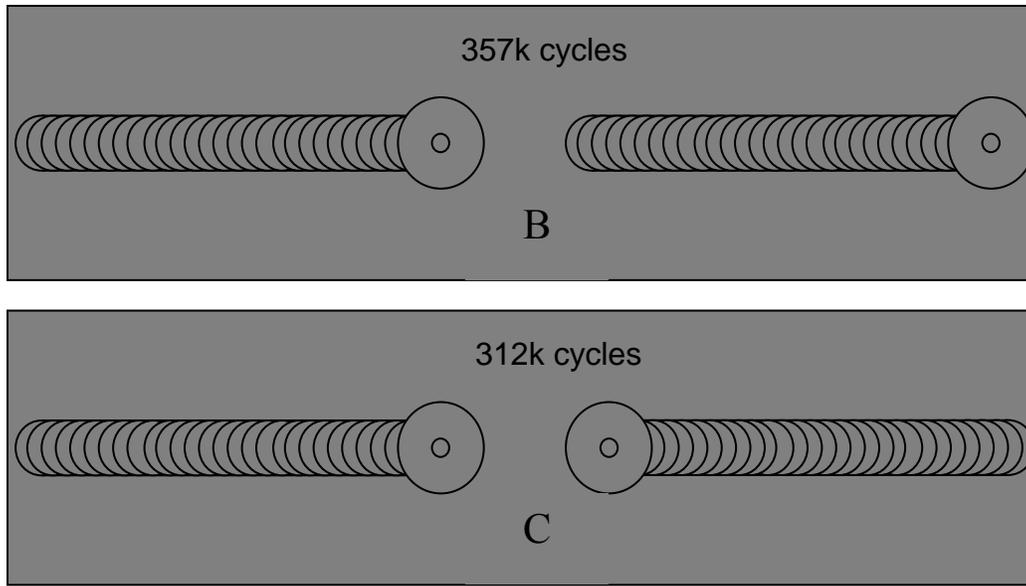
Swept Spot Weld added in to the Exit hole [40]
